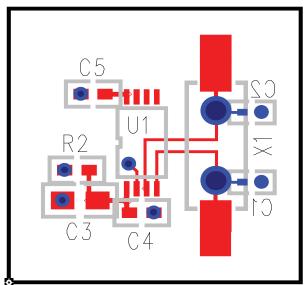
B. 843022 PC BOARD LAYOUT EXAMPLE
